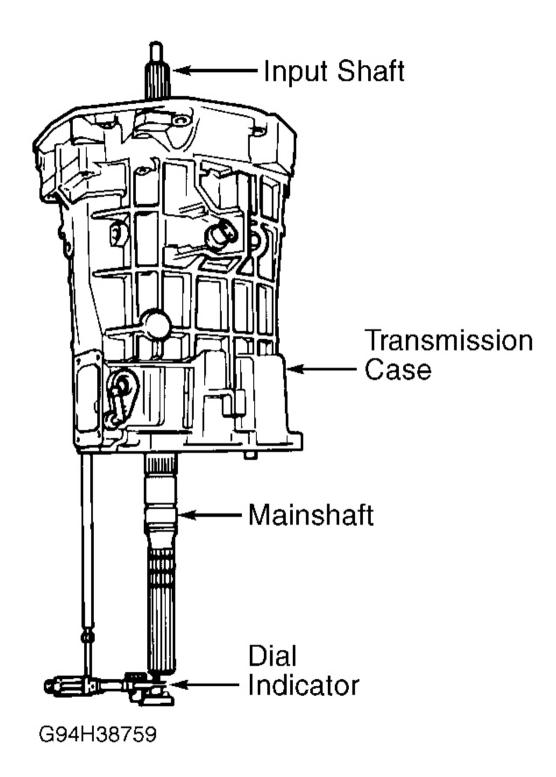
Measuring Input Shaft & Mainshaft End Play
